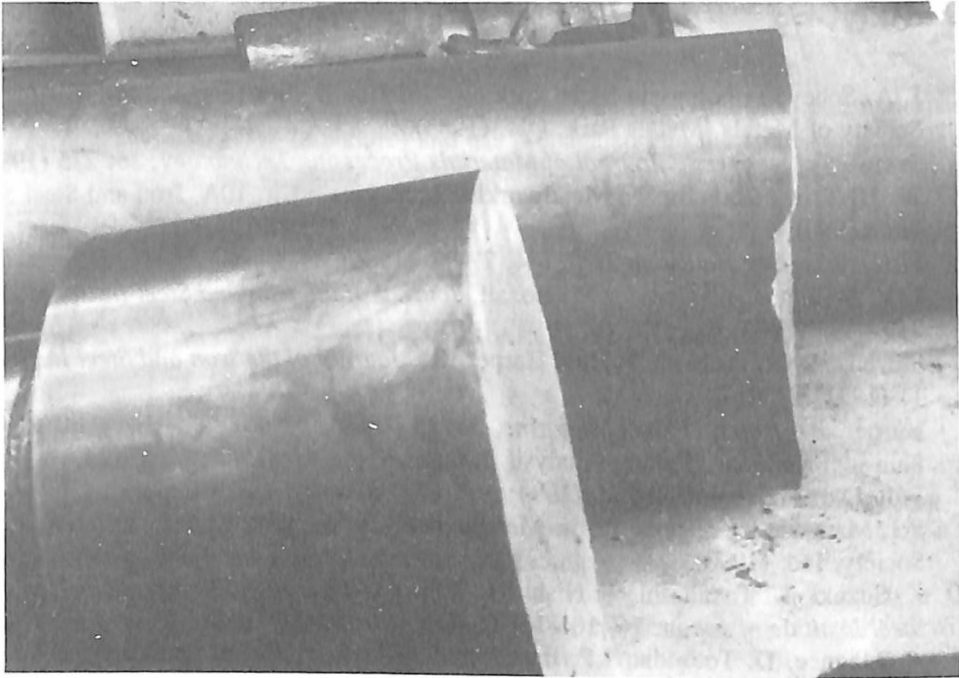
Mating fracture surfaces of a barrel breakage
